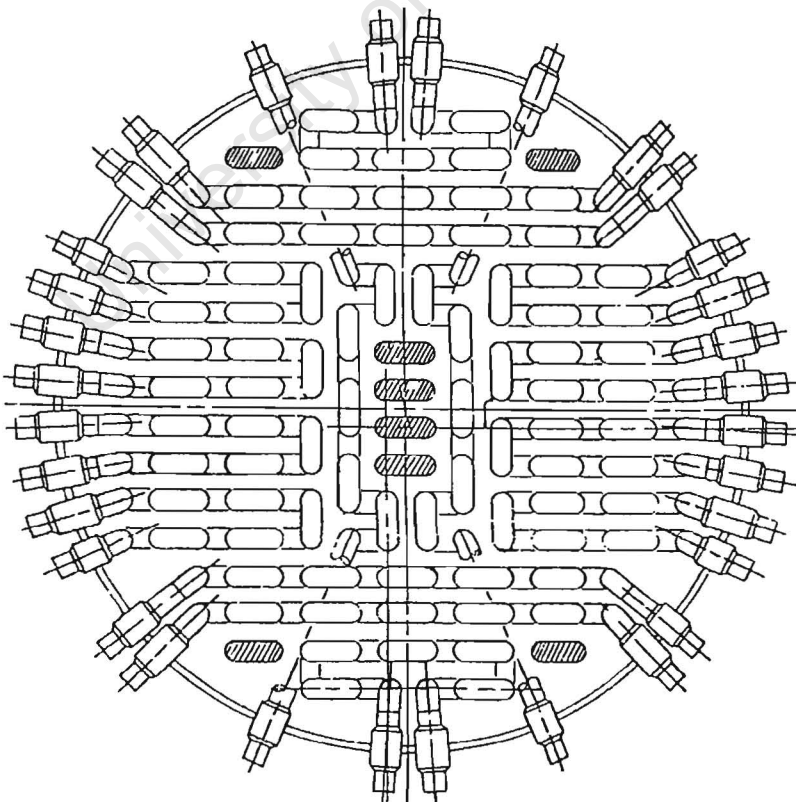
Reactor cross-section, showing layout of steam coil tubes.
